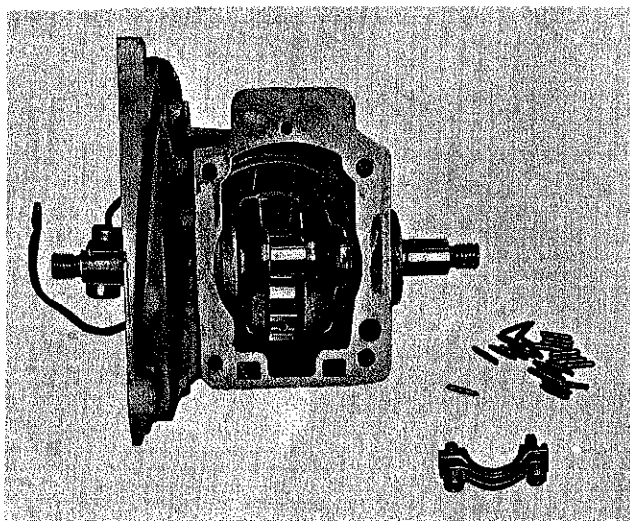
The connecting rod cap and 24 needle bearings removed from the connecting rod and crankpin.
